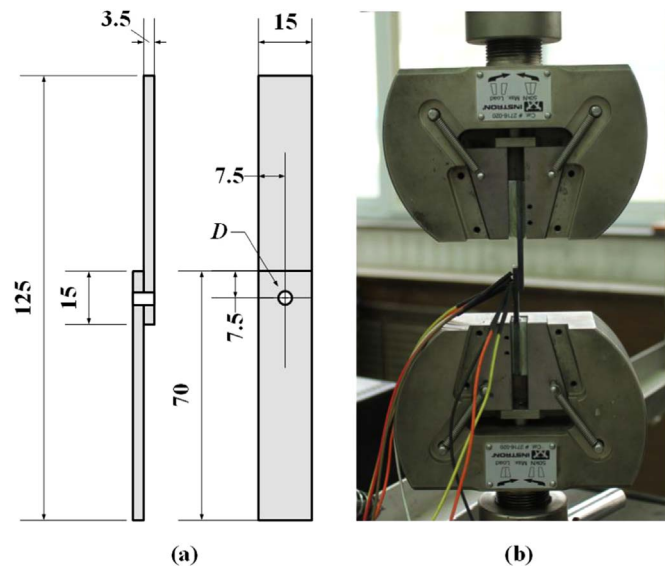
(a) 2D C/SiC z-pinned single-lap joint configuration, (b) shear tests set-up.
